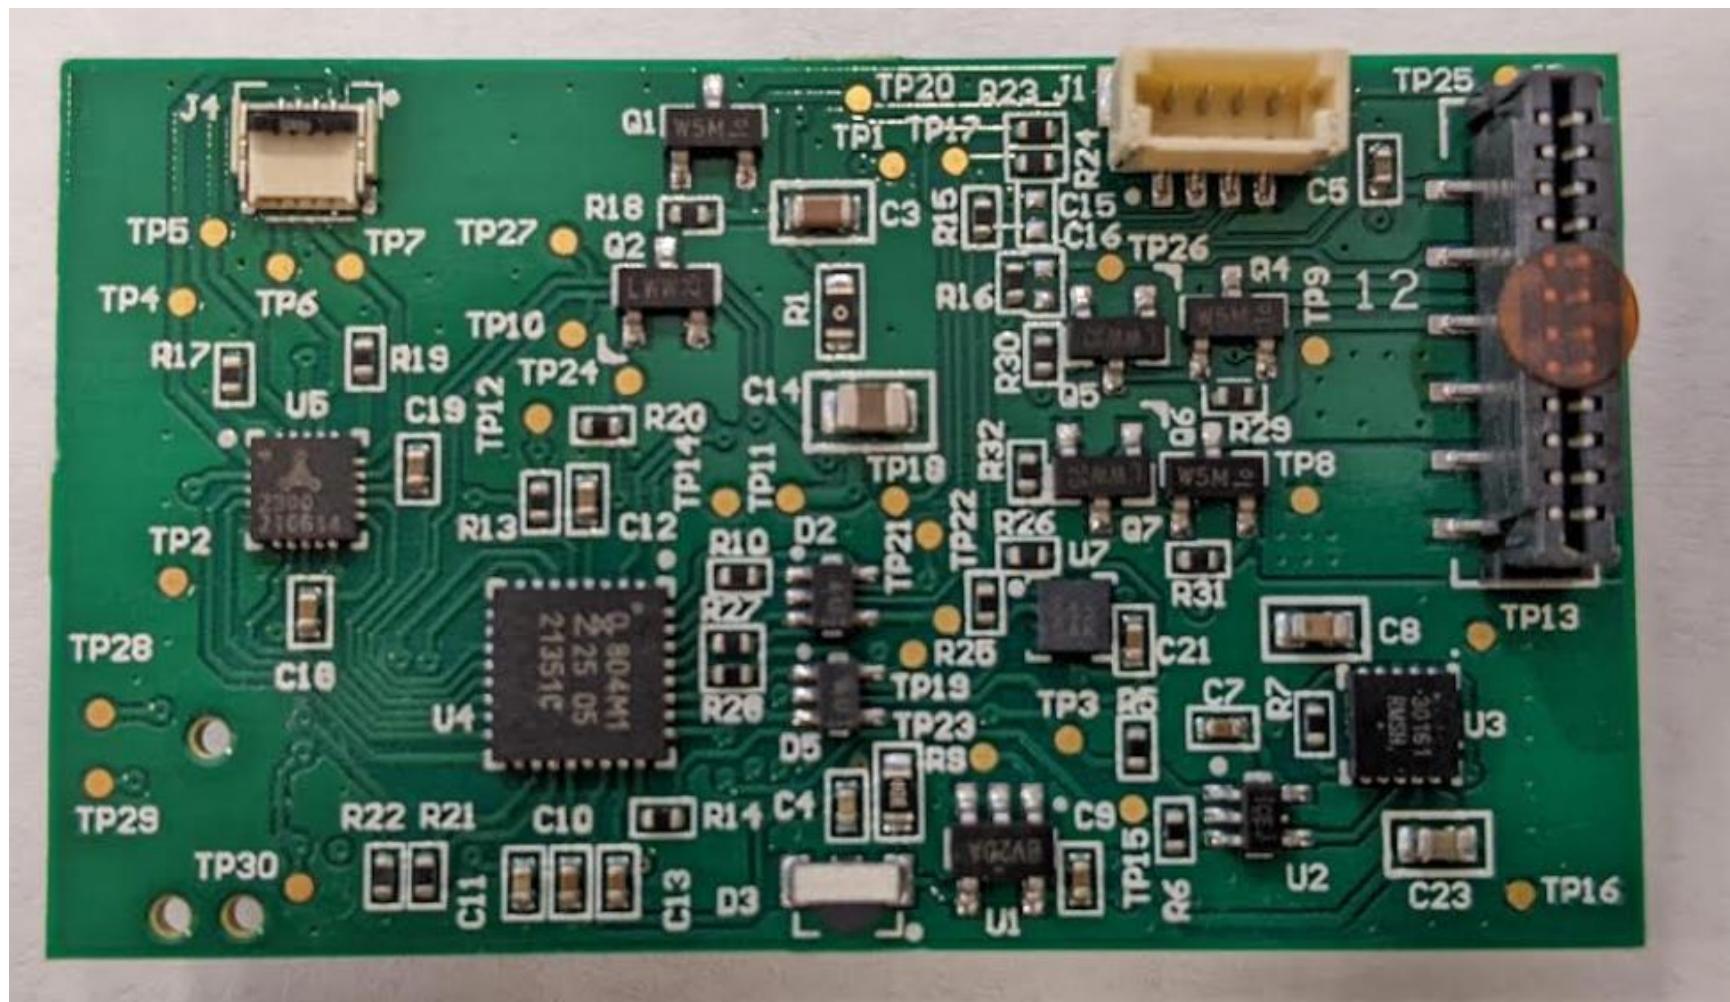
GF-PCA-00188-Rigid Head PCBA- Bottom
